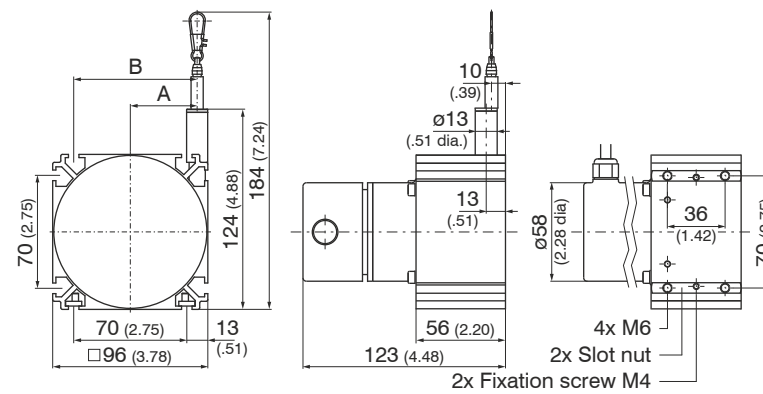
Dimensional drawing ... - FD96 - HTL/TTL, dimensions in mm (inches), not to scale
